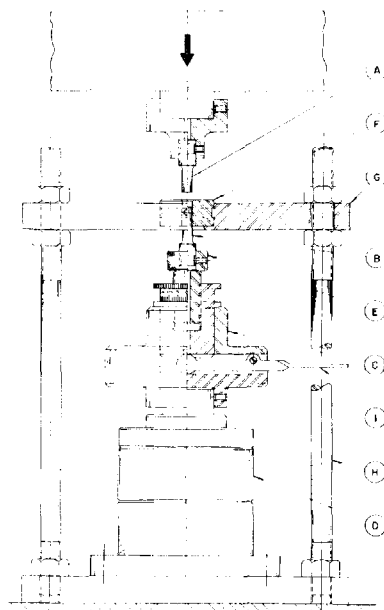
Fixture for compressing particulate solids. Key: A, upper punch; F, die; G, metal plate; B, lower punch; E, threaded bushing; C, flange holding lower punch; I, lifting lever; H, steel rods; D, compression cell.
